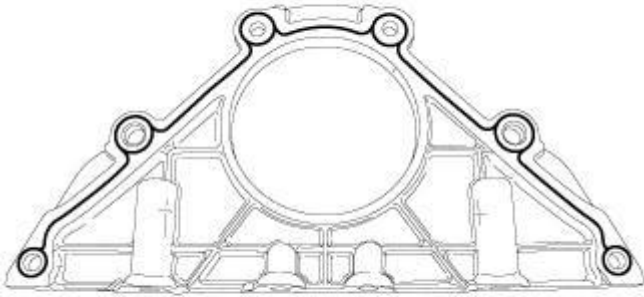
Front Oil Seal Carrier & Bolts
